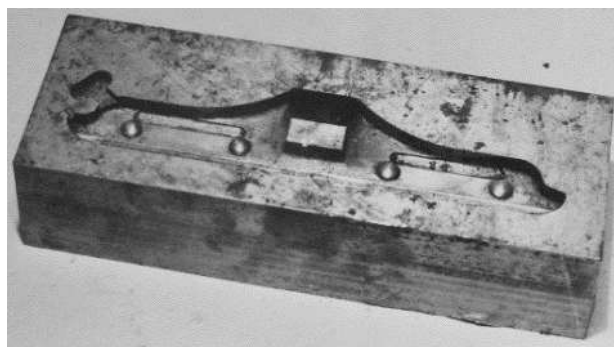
Insert for making the “bracket” casting from brass LS-49 (ЛС-49)
